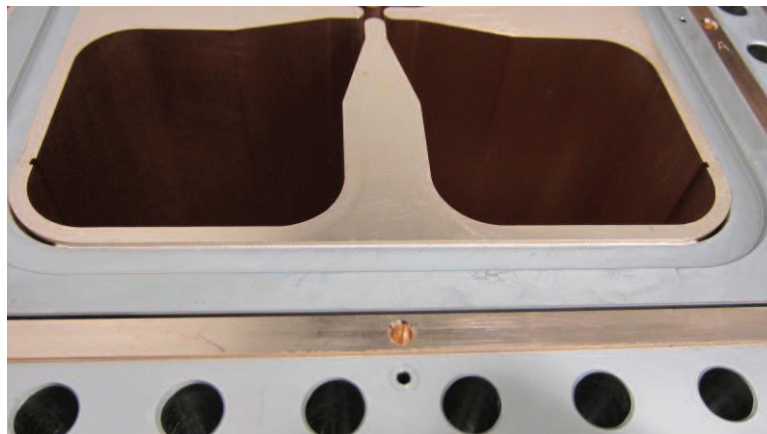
Detail of the copper-steel side flange and frame brazing on the miniprototypes brazed at CINEL
